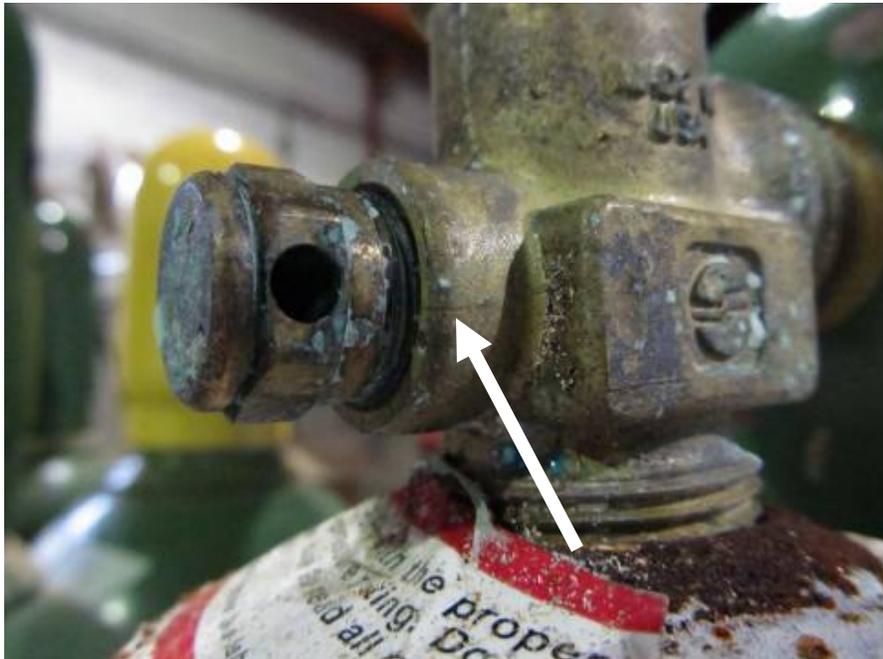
View of cracked cylinder valve. Arrow points to crack.
